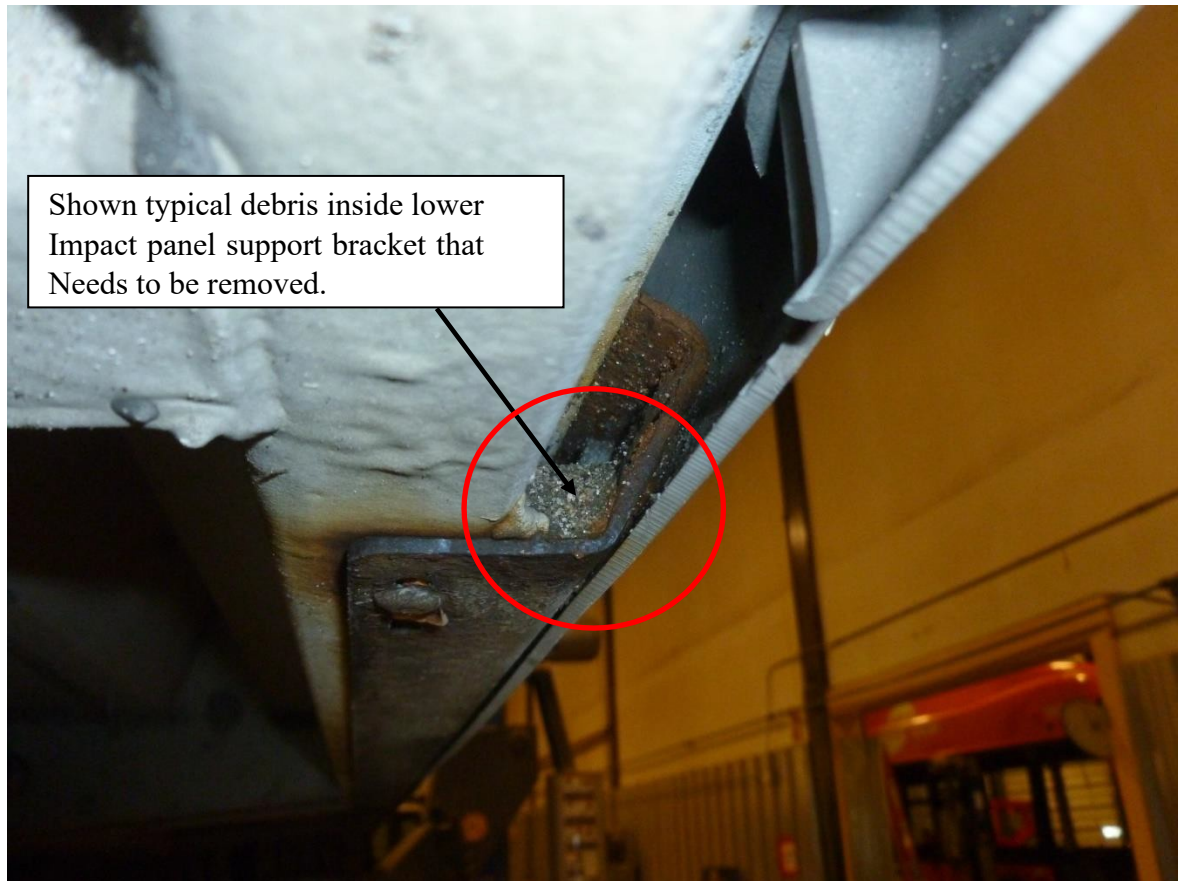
TYPICAL VIEW OF DEBRIS INSIDE OF LOWER IMPACT MOUNTING CHANNEL.
